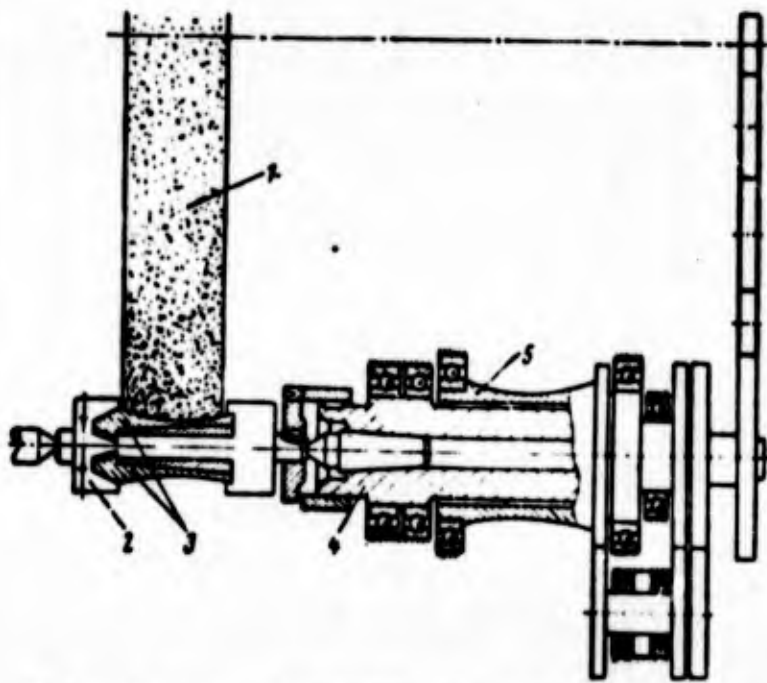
Diagram of conjugate grinding of back of blade tip on machines of type KhSh. 1) three-dimensional grinding abrasive; 2) mounting; 3) blades; 4) spindle of headstock; 5) three-dimensional master form.
